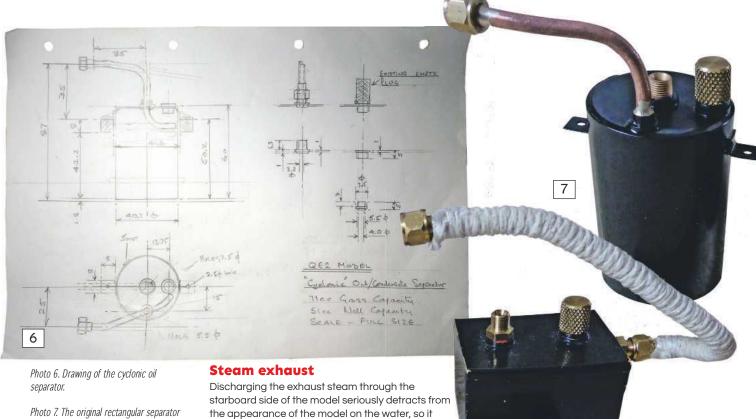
The original rectangular separator and the new cyclonic oil separator.
